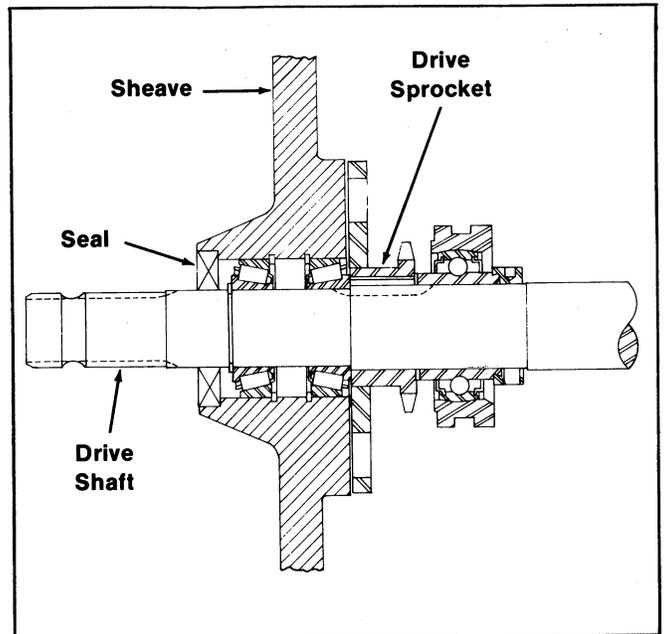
Mill/Blower Drive Cross-sectional View
